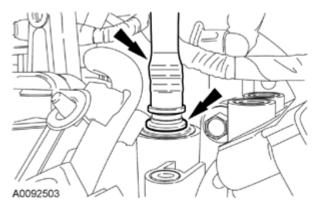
Locating Vacuum Hose And Quick Connect Fitting Courtesy of FORD MOTOR CO.
